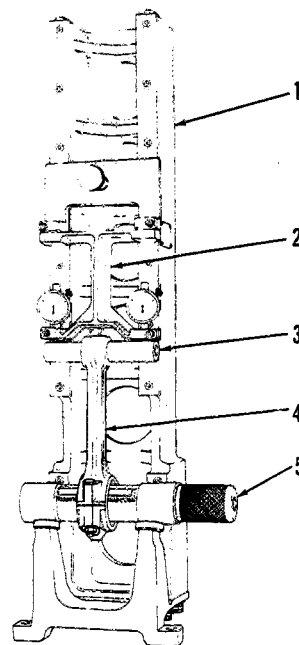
CHECKING CONNECTING ROD ALIGNMENT
